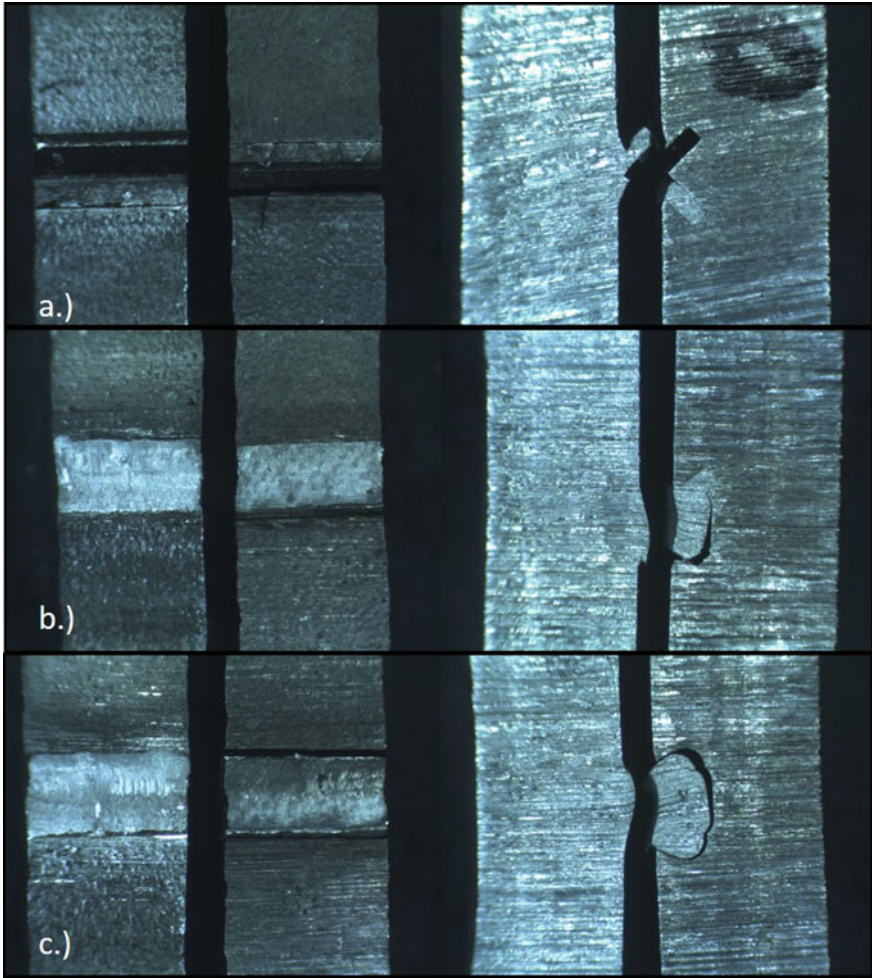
Failure surfaces and profiles of 3 FSE groove shapes. a Slit saw groove. b Modified slit saw groove. c Modified o-ring groove
